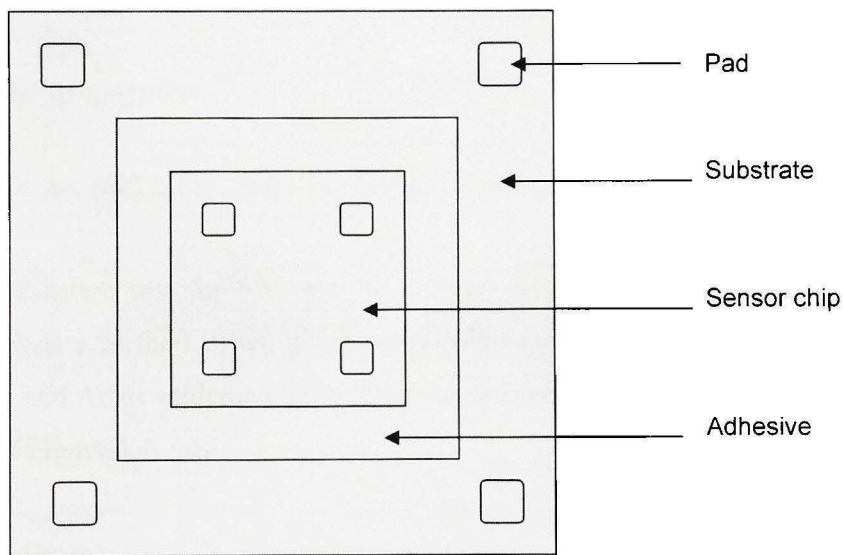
Top view of prototype 1 (conventional package prototype).
